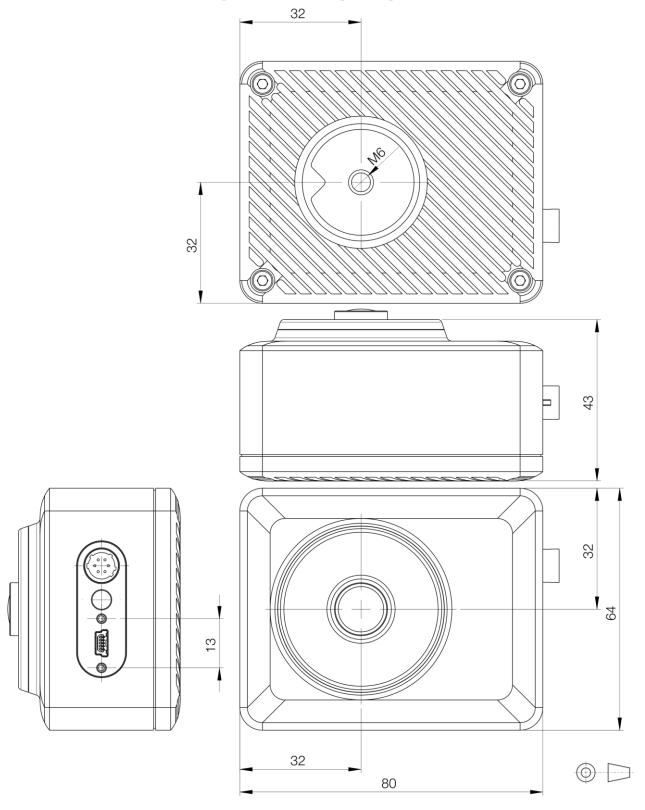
Cameleon in a housing with C-mount lens holder and LED-ring
